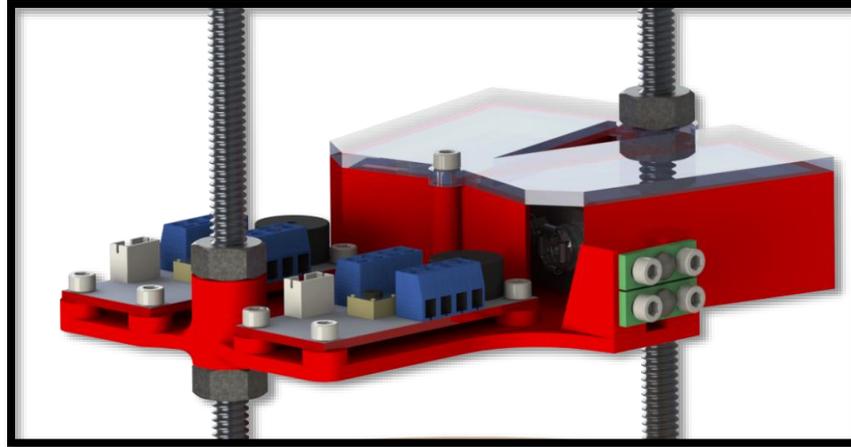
StratoLogger sled secured inside a coupler on two threaded rods.
